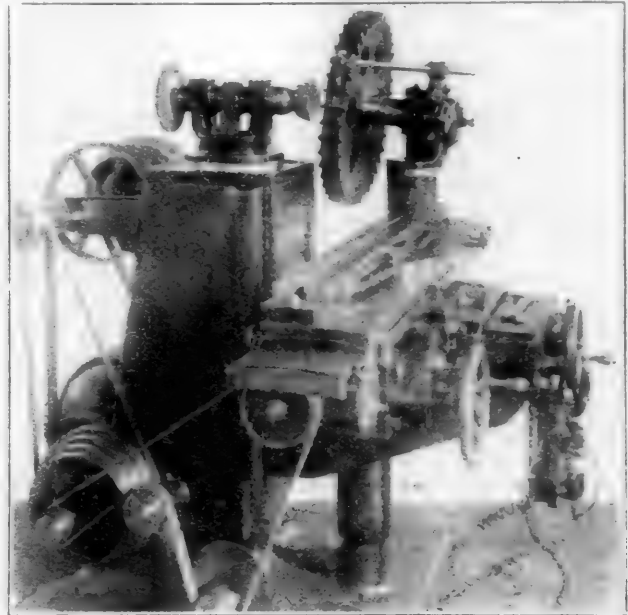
SHARPENING THE SIDE TEETH OF A LARGE INSERTED TOOTH FACE MILL.
